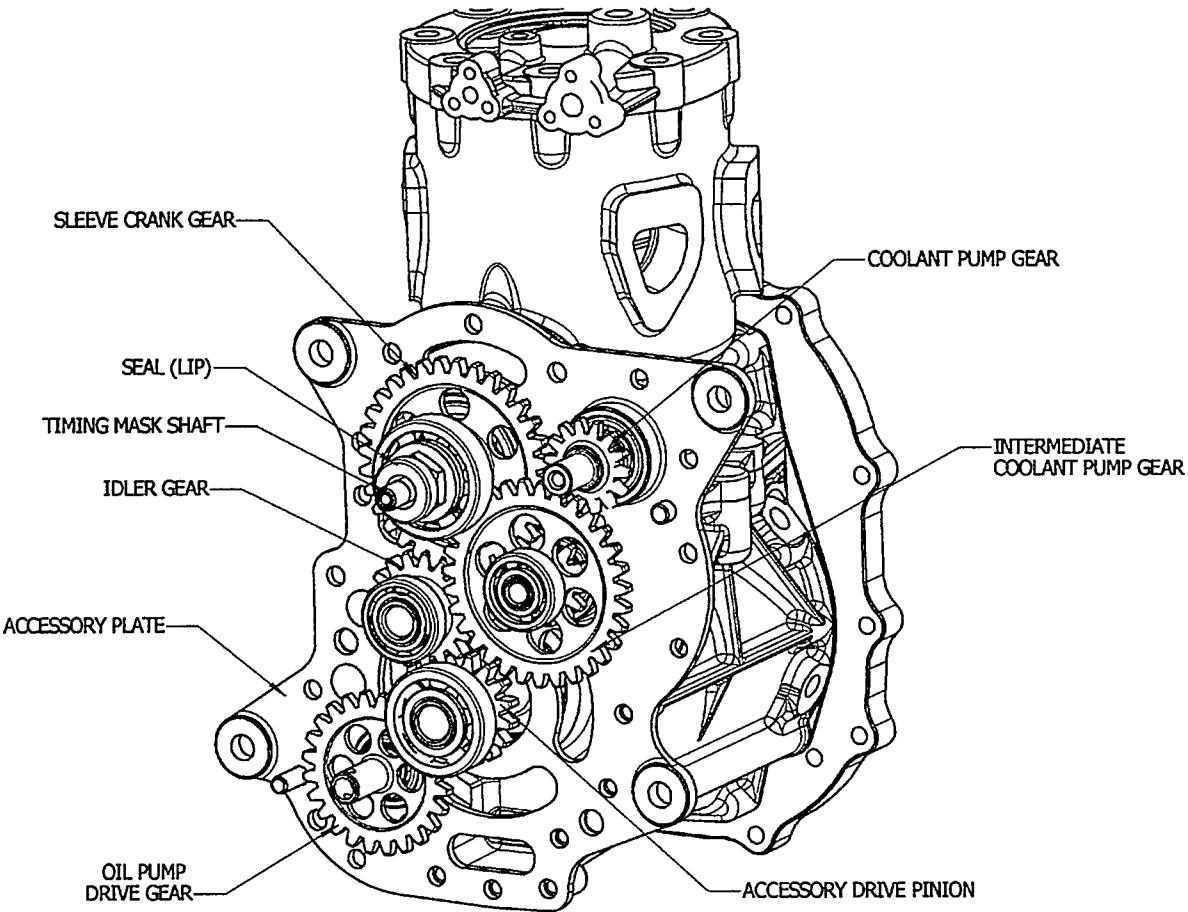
Isometric view of the rear of the engine, with the accessory case removed to expose the drives for oil pumps, coolant pump, and sleeve. The case also allows for a generator drive.
